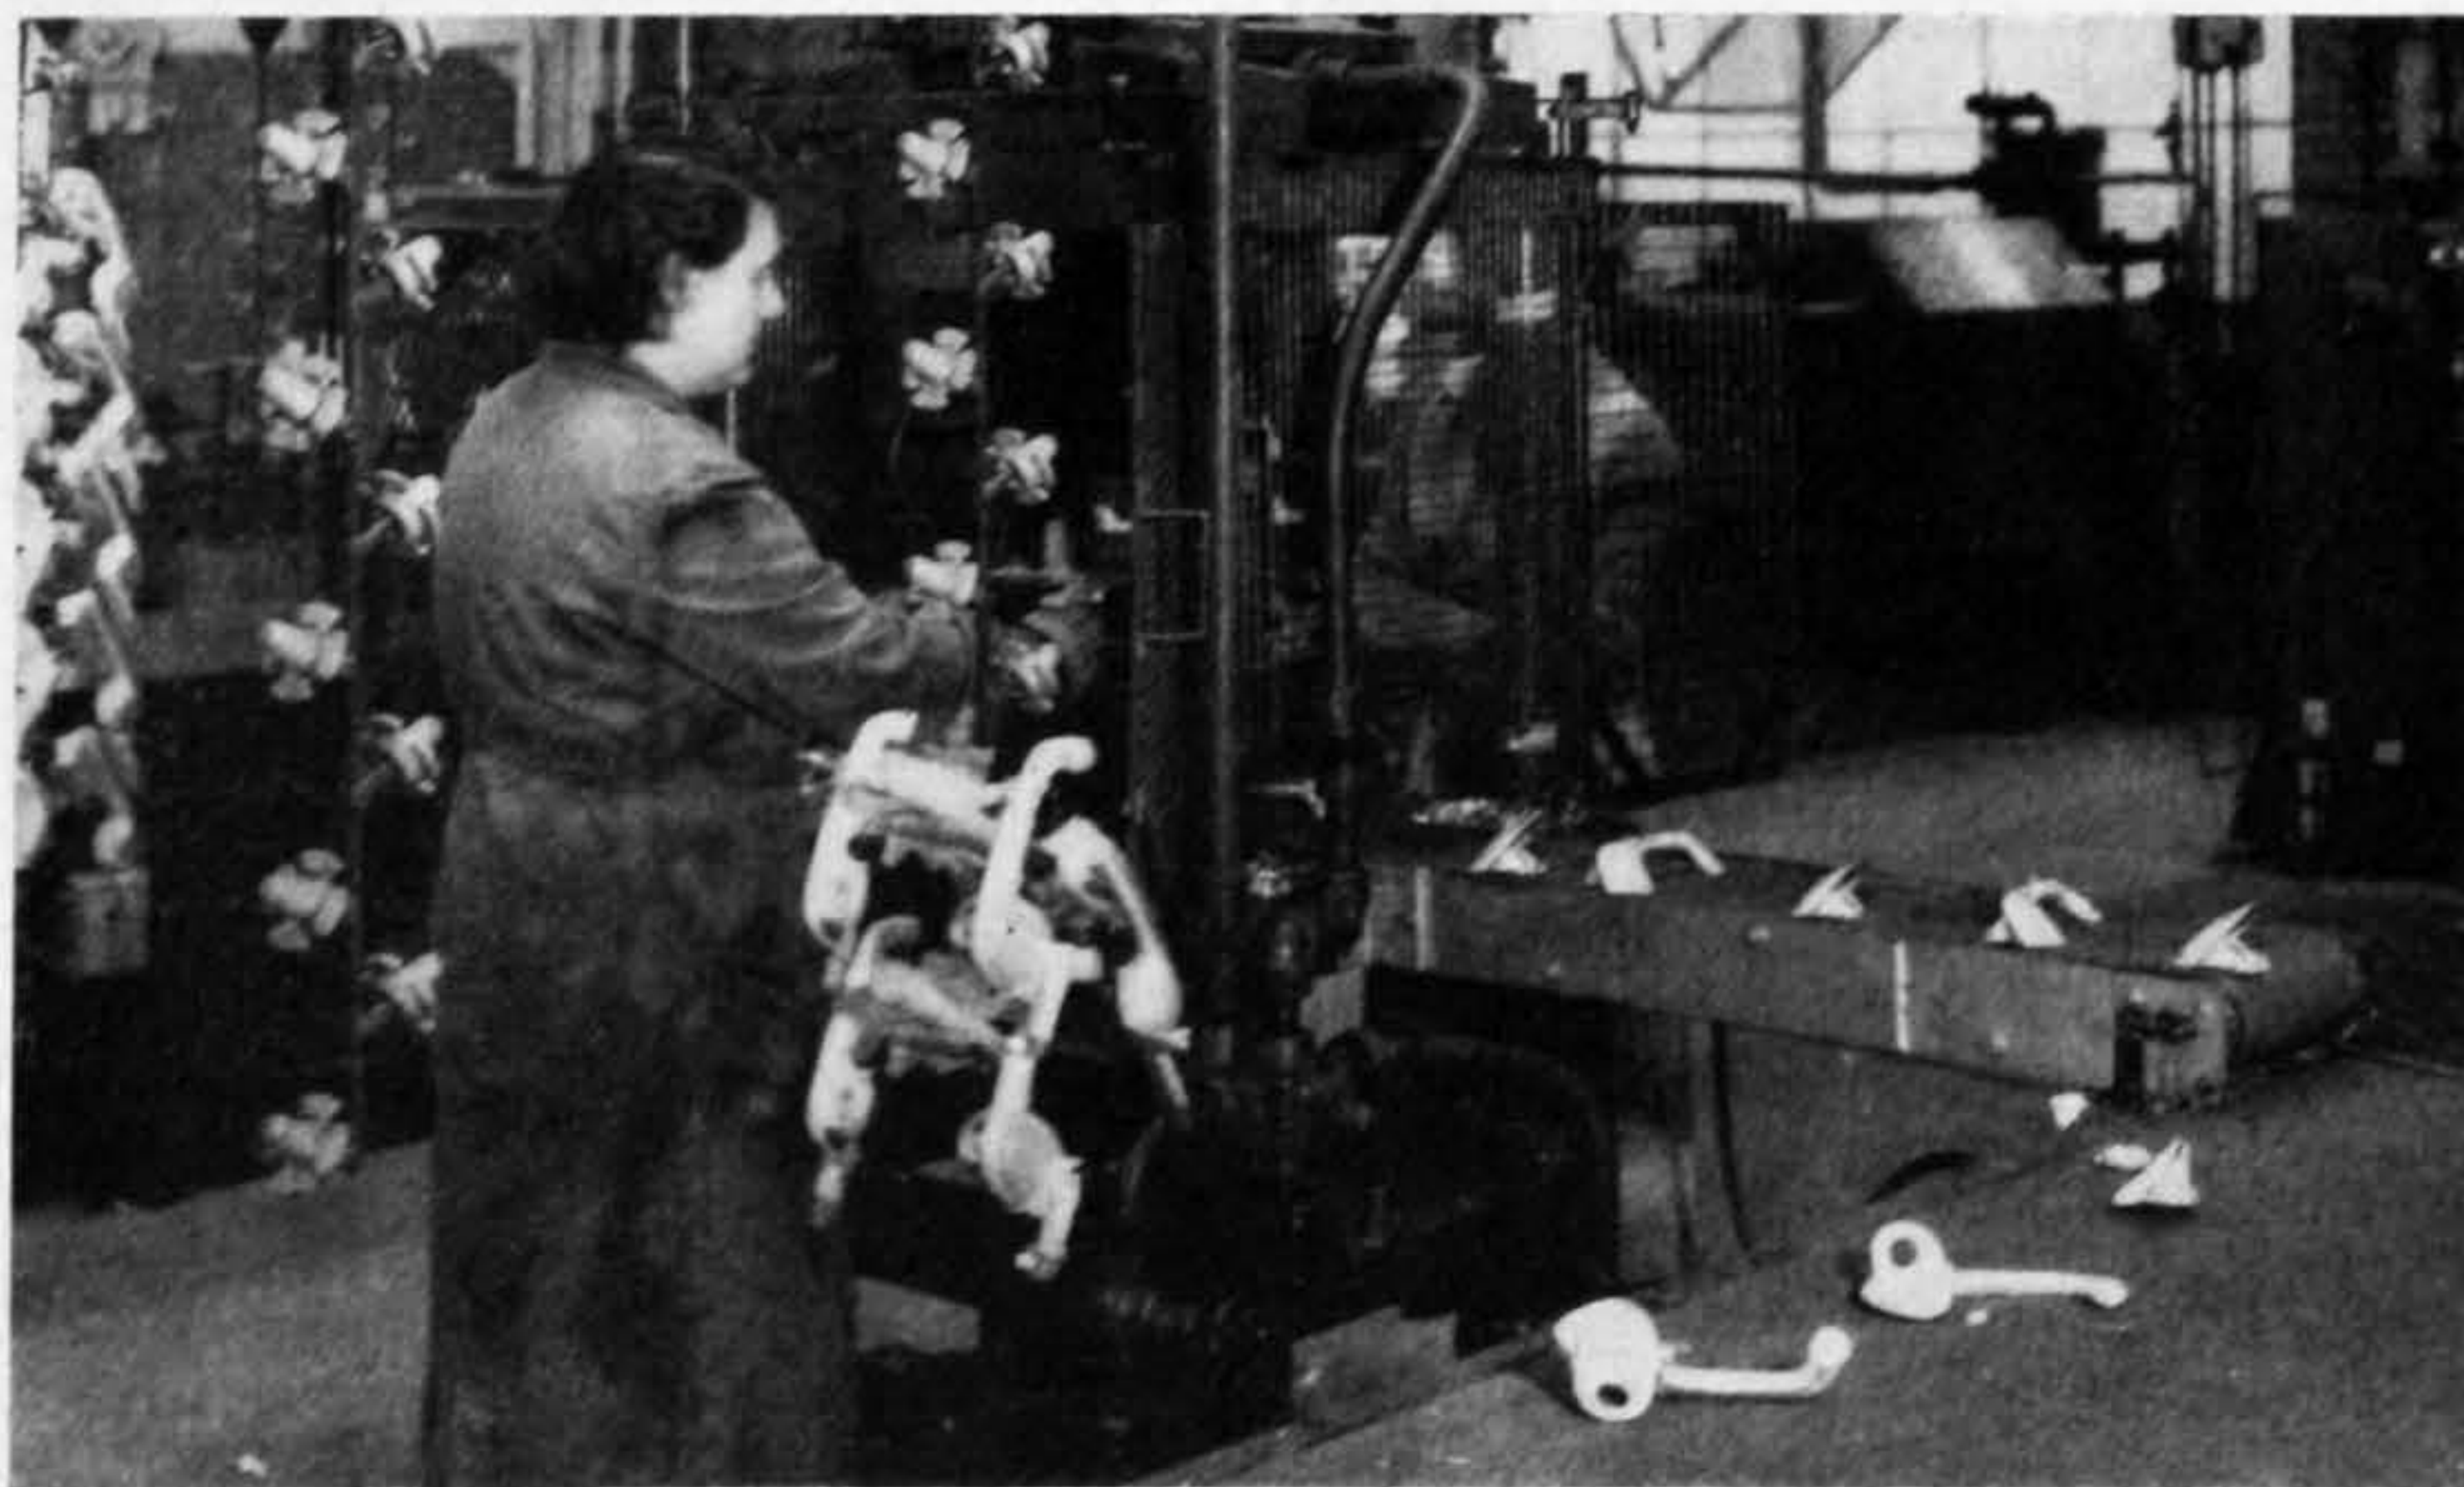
Castings being removed from feed conveyor at first stage of trimming line. Here the sprue is removed and the casting placed on a belt conveyor leading through subsequent trimming stations
